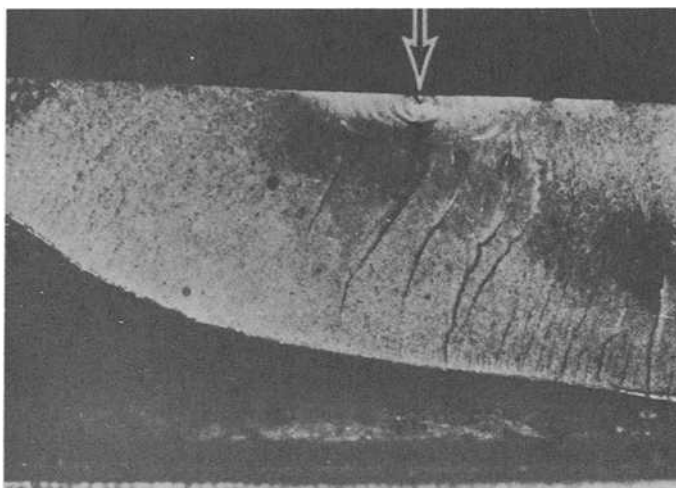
Illustrating rivers in a fatigue fracture in a 1050 steel gear. Arrow indicates a forging defect at the origin of the crack. Magnification about  $\times 2$ . From Metals Handbook, Vol. 9, pp. 405, #4890.
